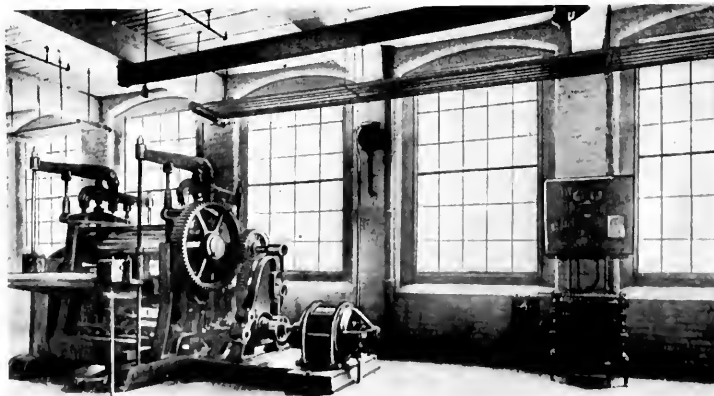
15-h.p., 600-r.p.m., 550-volt Slip Ring Induction Motor and Panel for Plater
